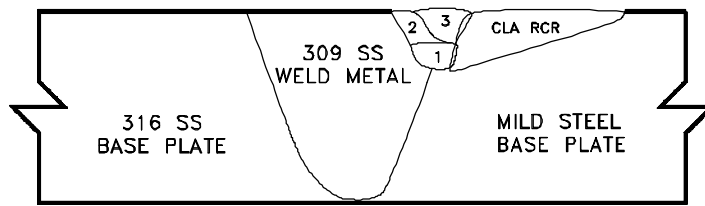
Weld Sequence for Buttering Layer
